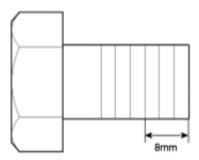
Identifying Sealant Applying Area On Flywheel Bolt Courtesy of HYUNDAI MOTOR CO.
